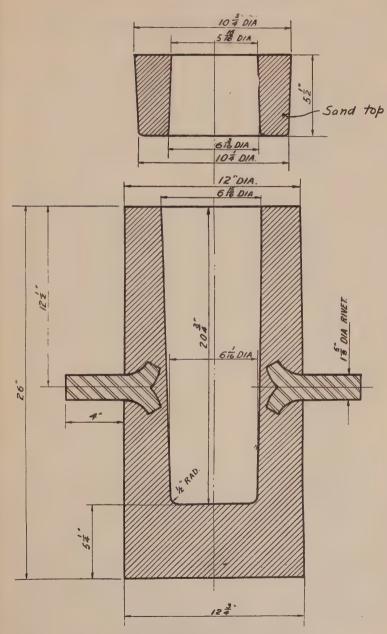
Solid Bottom Mould for 6-inch Shell Ingot.
